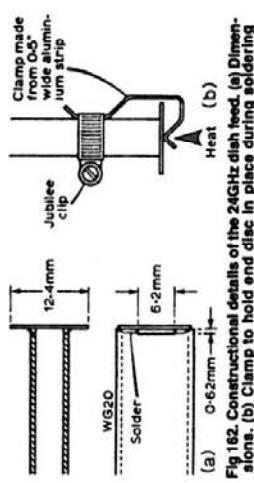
Construction details of the 24GHz feed. (a) Dimensions. (b) Clamp to hold end disc in place during soldering
